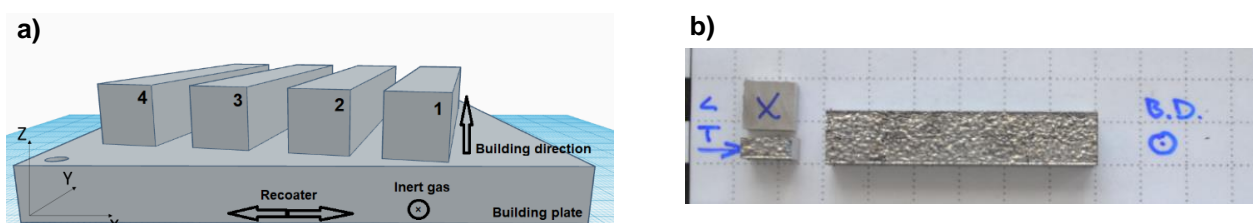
a) Bulk specimens on the build platform, b) analysed planes (B.D. – building direction)
